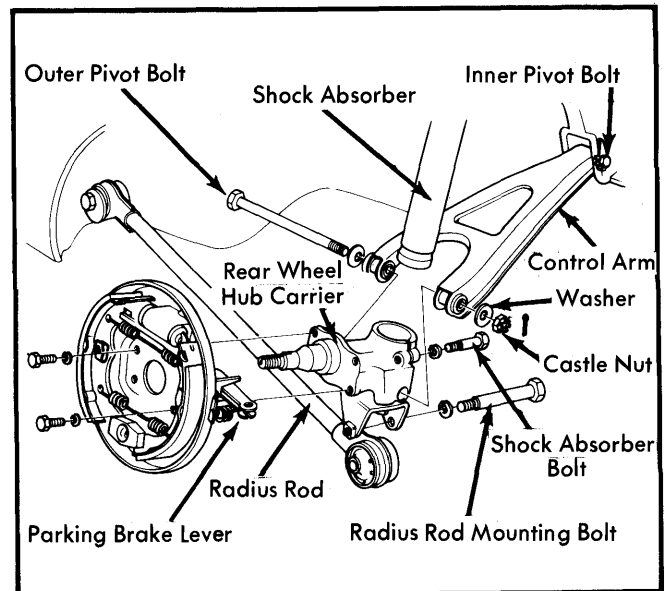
Exploded View of Accord Rear Suspension — Other Models Are Similar
